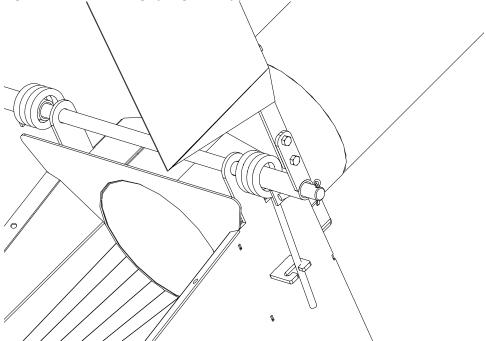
Attaching Upper Sides Frames to Shaft Brackets
